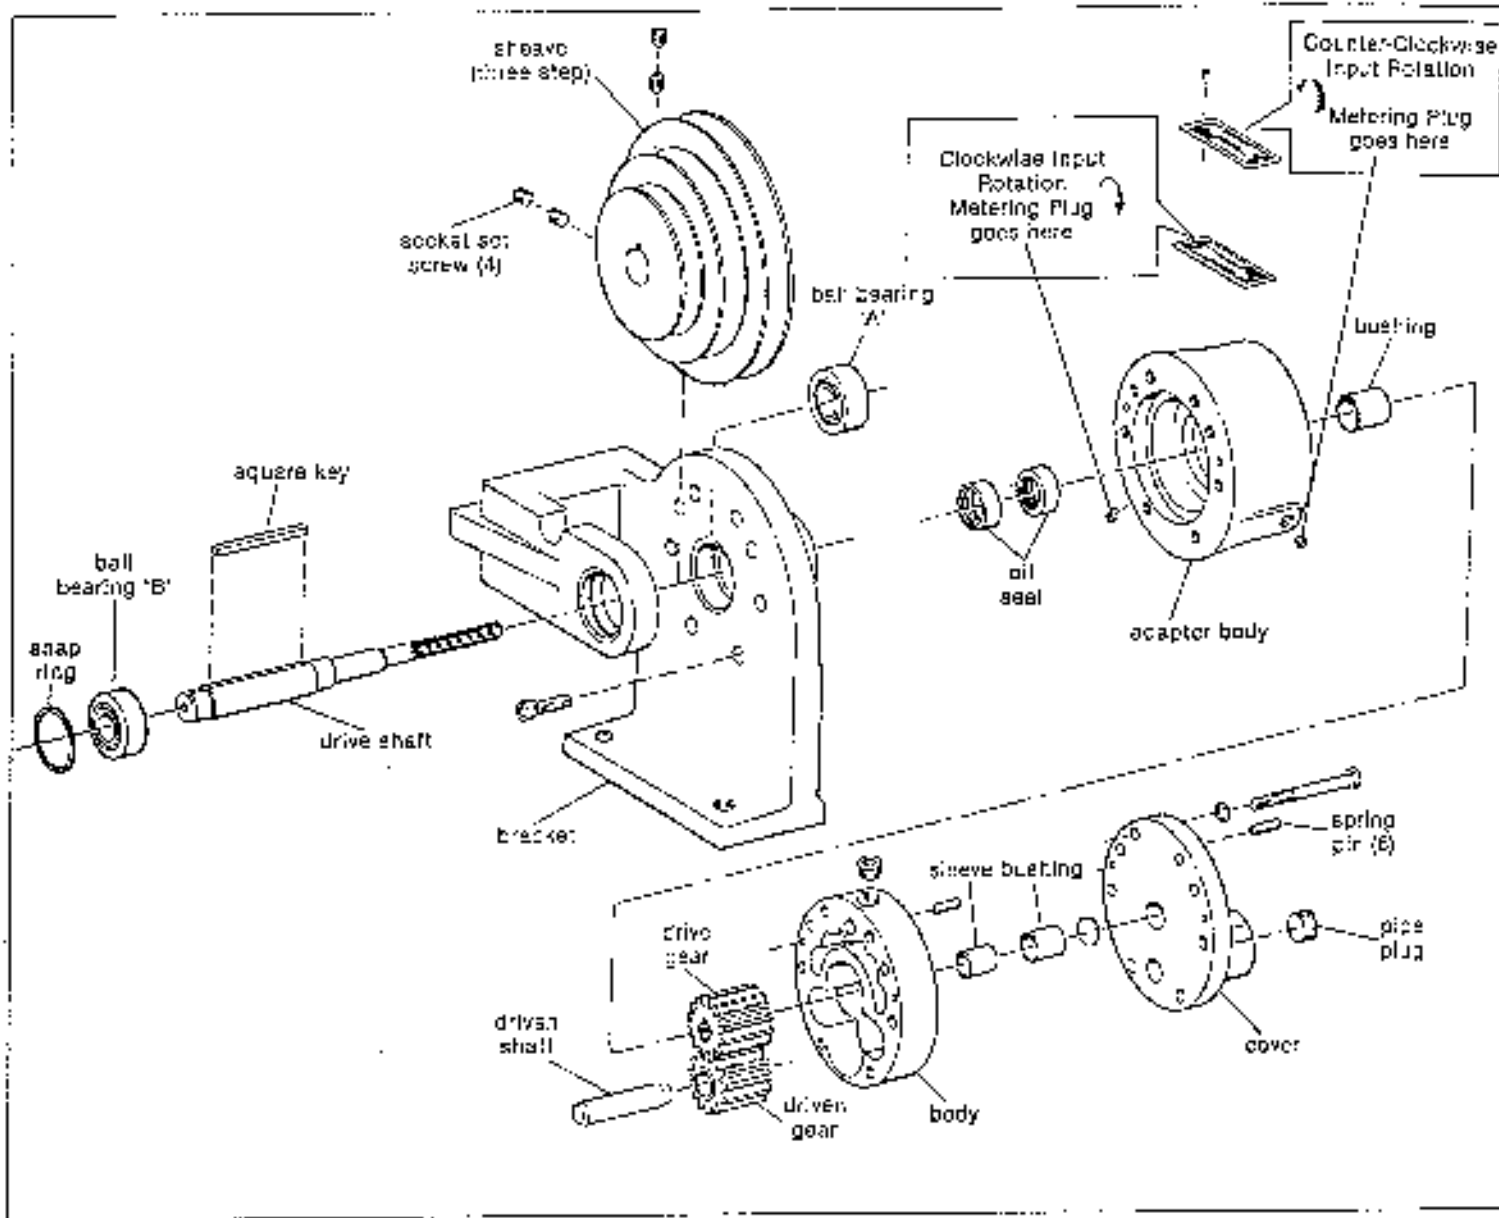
Oil Pump; Belt Driven Single Style Shown
